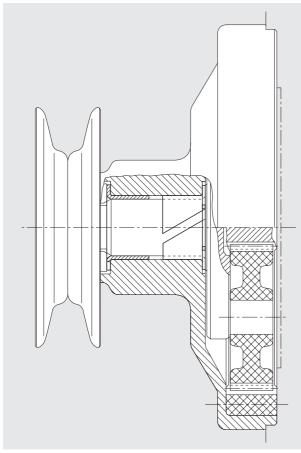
Gear for washing machinewith Plastic Plain Bearing Type 1320-5..Input speed1,330 min⁻¹Output speed130 min⁻¹Drive torque520 NcmBelt tension on belt pulley400 N $p \cdot v_{max} = 64$ N/cm² · m/s
